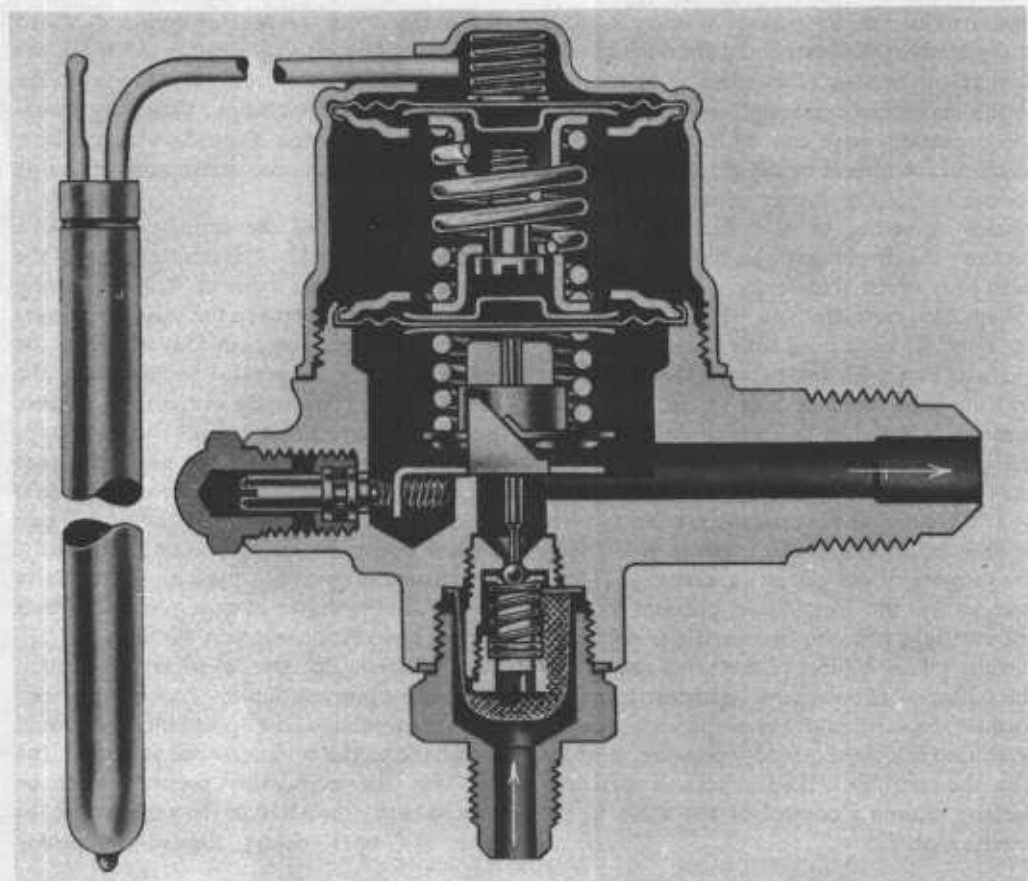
Spring-type pressure limiting valve. (Courtesy Detroit Controls Division, American Radiator and Standard Sanitary Corporation.)
